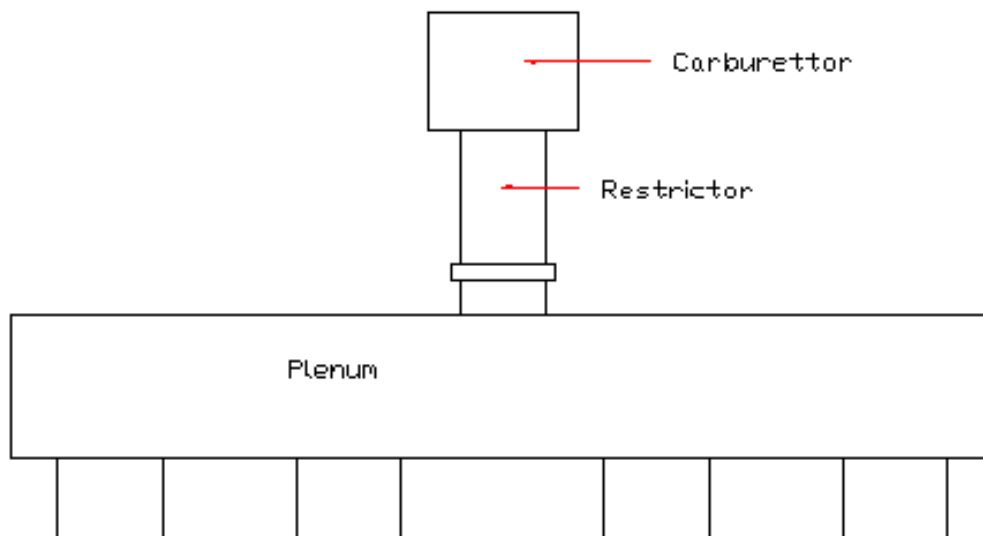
Prototype intake manifold buffer end adjuster.
